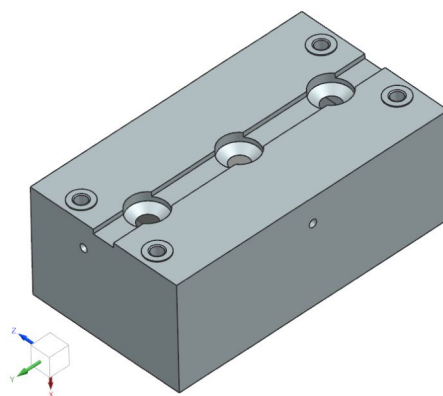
The back of the stator housing, showing the features designed for potting and mounting onto the setup.
